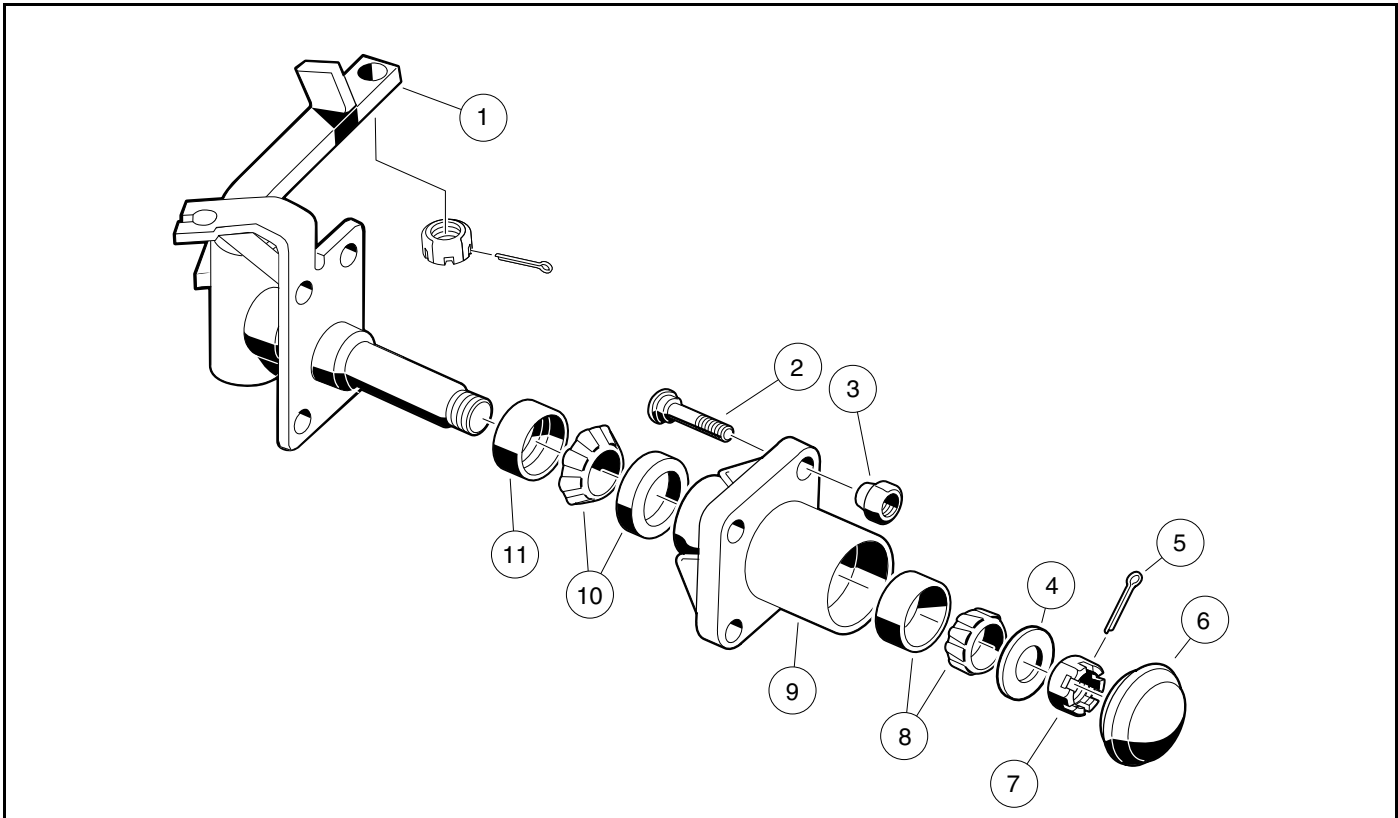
Front Spindle Assembly (Four-Wheel Brake Vehicles)
